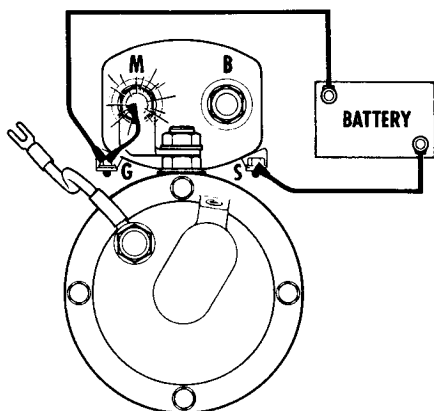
Circuit for checking pinion clearance. (Types shown in Figures 1, 2 and 3.)
